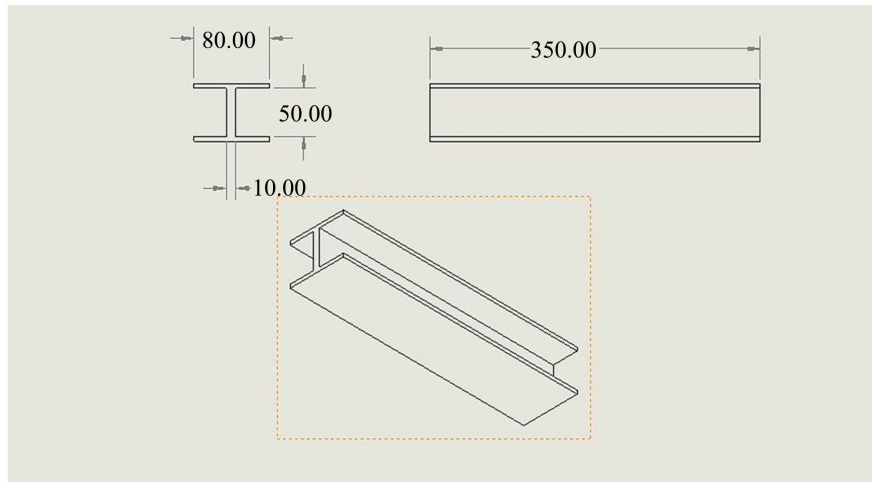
I cross-section type of the side door impact beam (all dimensions in millimeters).
